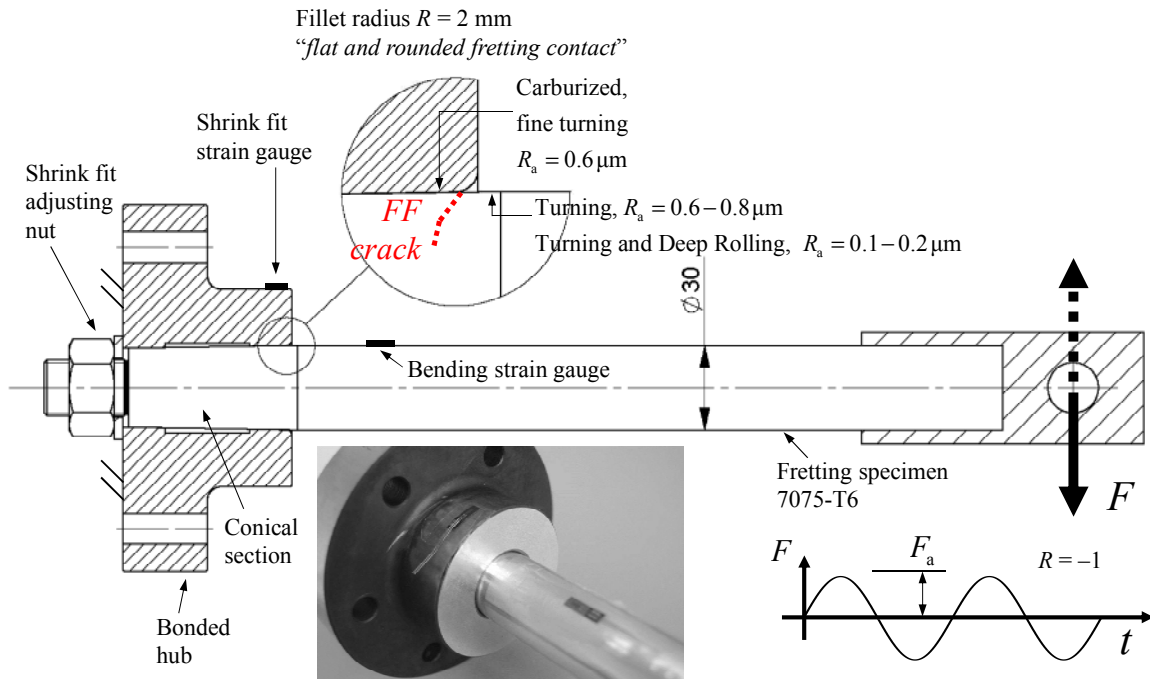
Test setup, bending load and machining details at the fretting interface.
